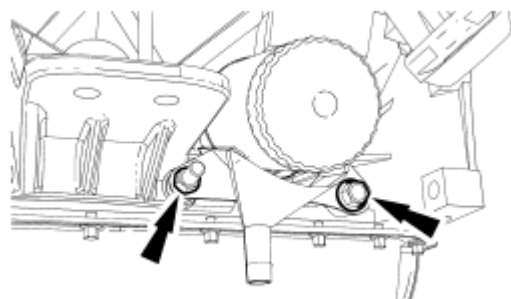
Locating LH Engine Support Insulator Bracket & Bolts
